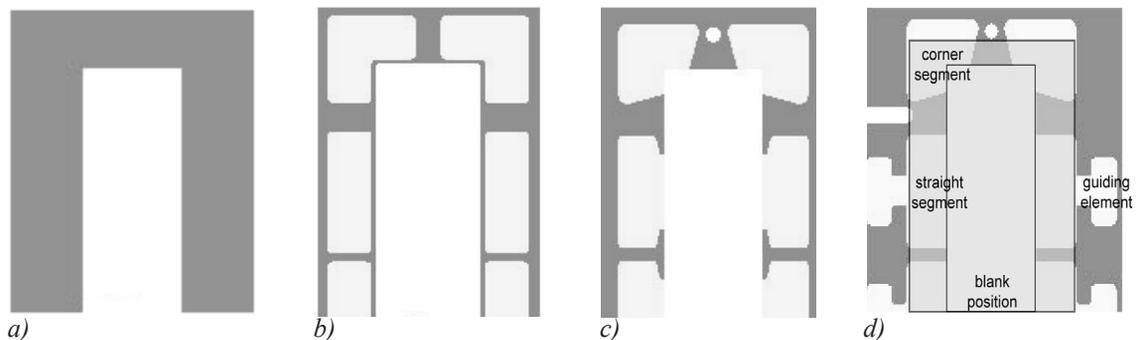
a) Conventional blankholder and b), c), d) three versions of segmented blankholder
